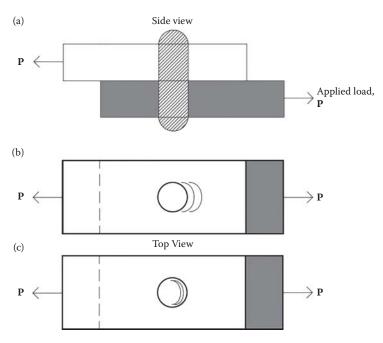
Illustration showing (a) section, (b) compression into sheet adjacent hole, and (c) compression being induced upon the rivet due to the top plate being pulled into the rivet
